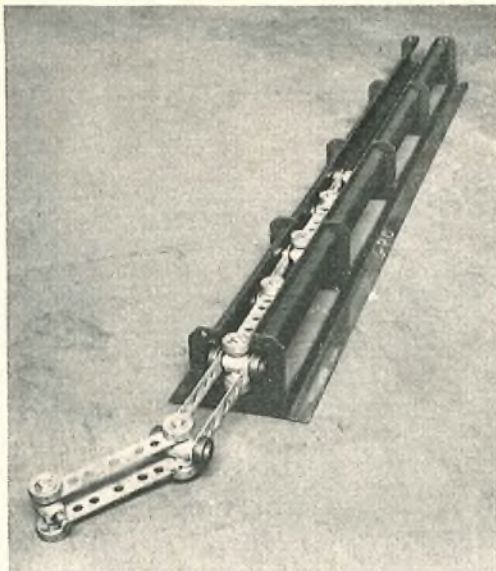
SECTION OF CHAIN CONVEYOR SHOWING FLANGED STEEL CHANNELS, LOCATING WEBS AND UNIVERSAL CHAIN
